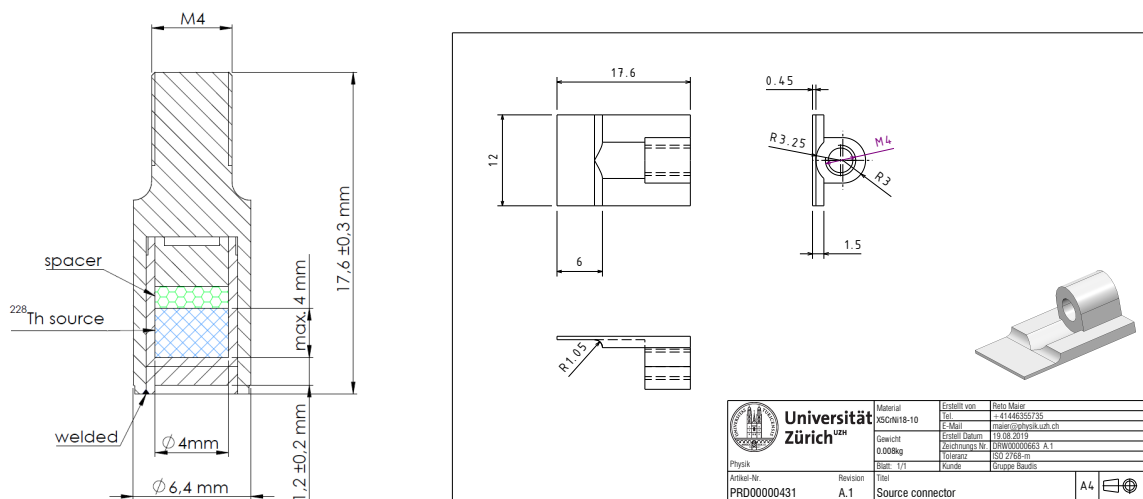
Left: drawing of the radioactive calibration sources for L-200, as published in Ref. [1]. The sources were produced at LANL, following the UZH design. Drawing provided by UZH technician J. Franchi. Right: technical drawing of the source holder attached to the SIS stainless steel band via resistance spot-welding. The holders for the sources were produced at UZH directly. Drawing made by the head of the UZH workshop R. Maier.
